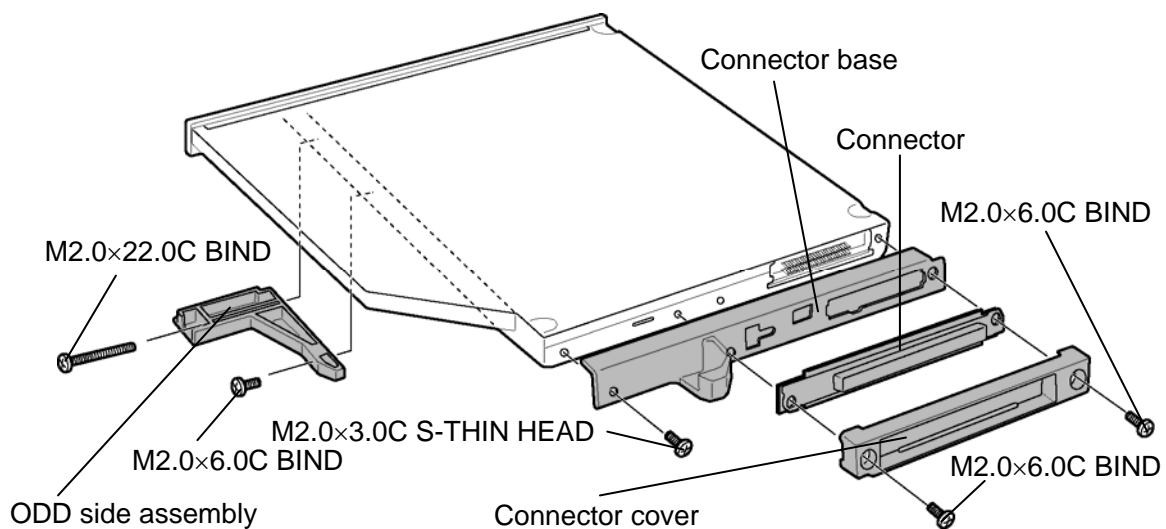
PATA Detaching the optical drive assembly(PORTÉGÉ M700 only)
